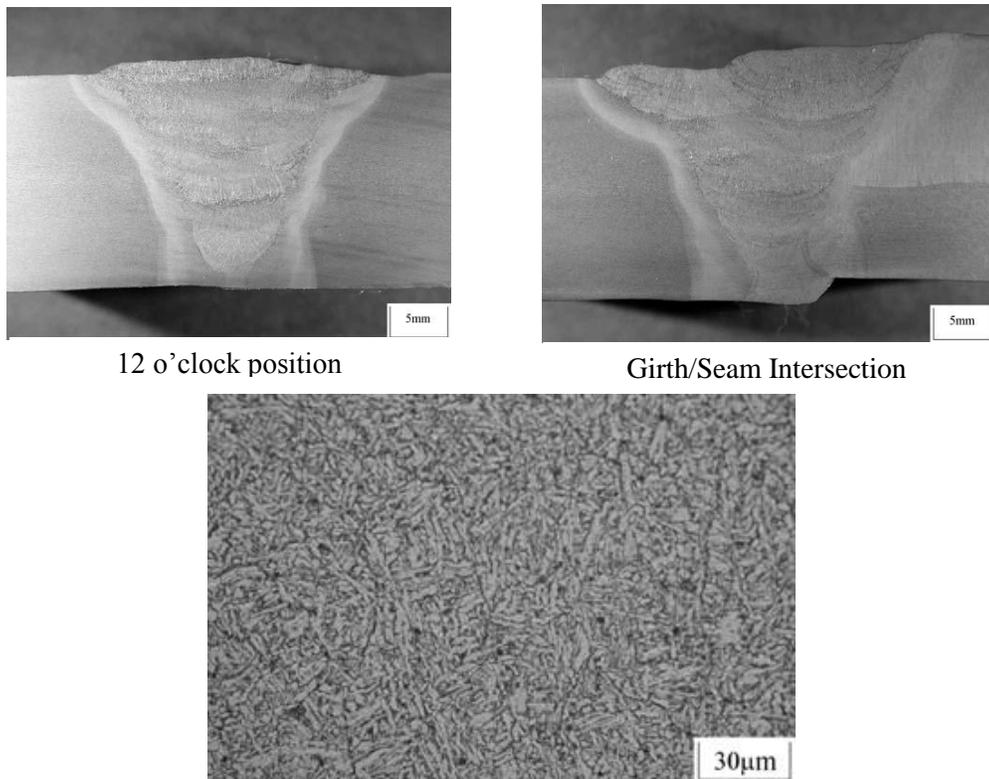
Macro sections and typical cap weld microstructure of a tie-in weld made with FCAW-G
